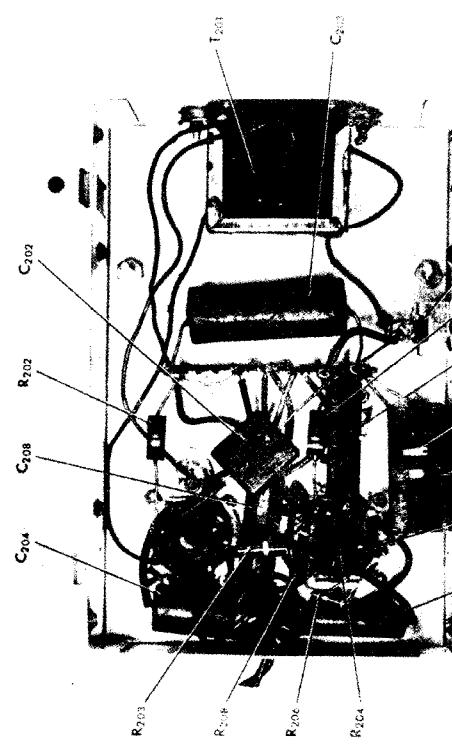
Bottom view, high voltage power supply chassis, component location.
